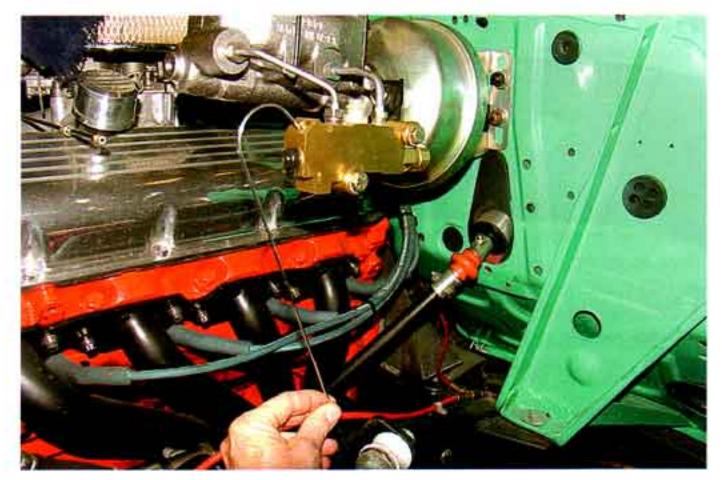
& 3b: It is helpful to bench bleed the master cylinder by adding fluid and pumping while it is chucked in a vise. Pump the cylinder until it is free of air and fluid is running out both lower ports. Install the dual master cylinder using the two lower studs on the firewall. Be sure the pushrod engages the hole in the piston at the rear of the master cylinder.
